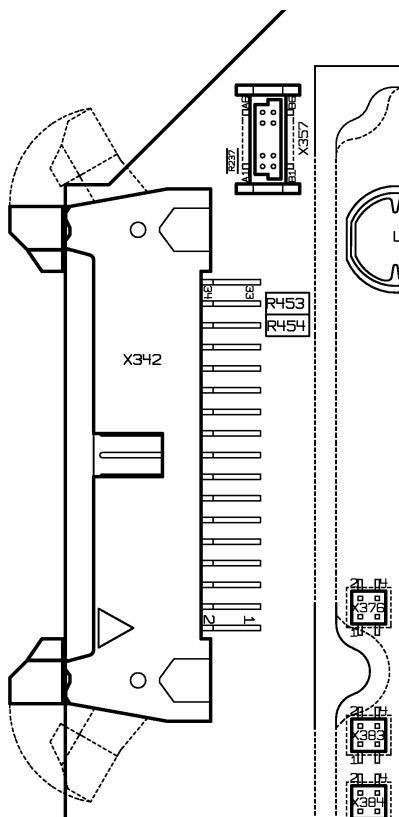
Connection X342 to Display Adapter Board and X357 to Keyboard Controller Board
